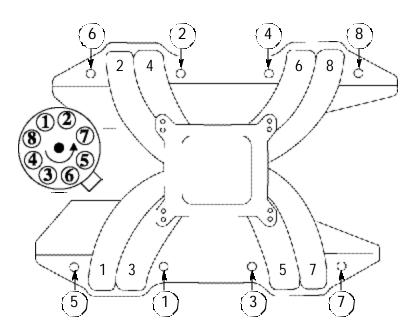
400-426-440 c.i.d. Chrysler Intake Manifold Torque Sequence
